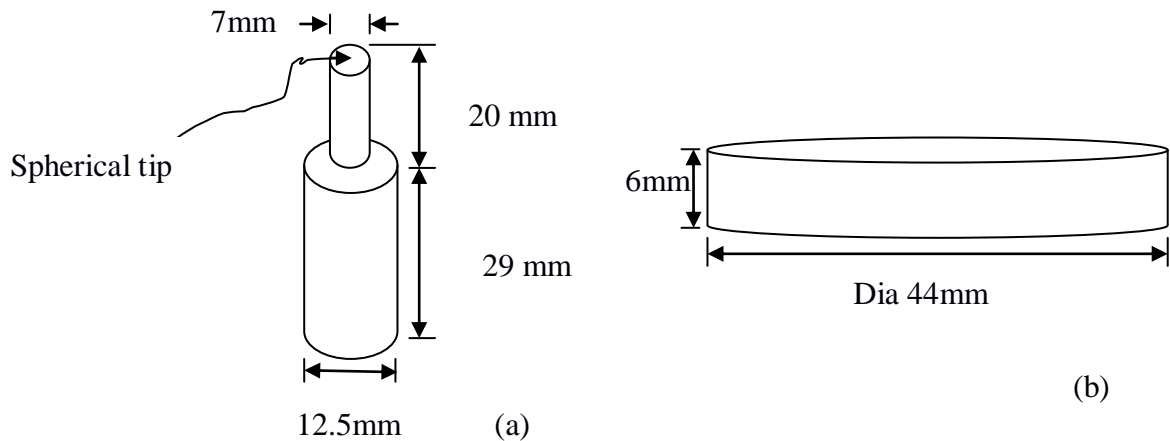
(a) Test Pin dimension (b) Test Disk dimension
